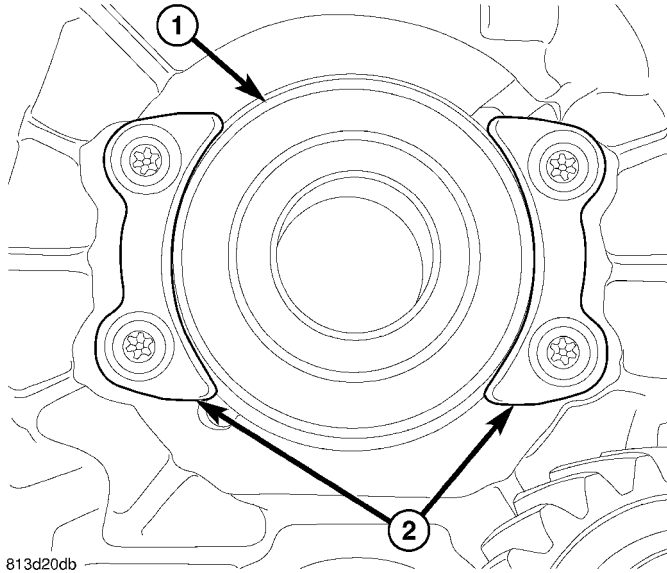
REAR MAINSHAFT BEARING RETAINER
